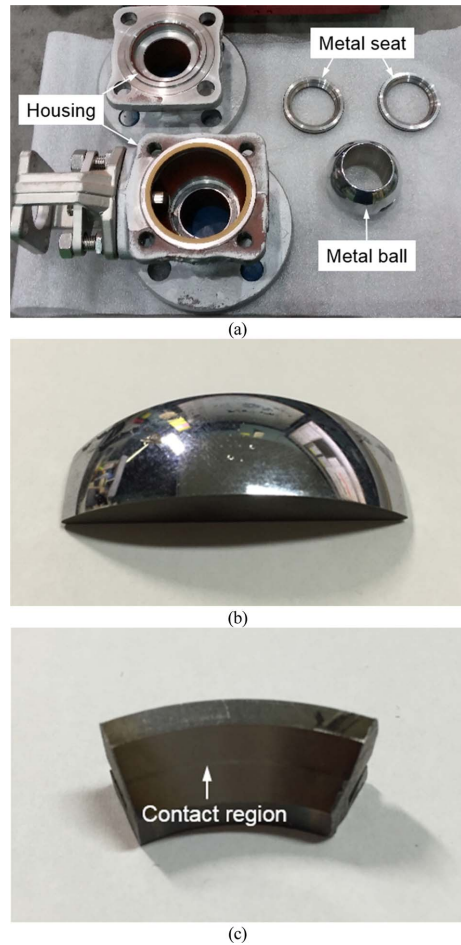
Photographs of (a) components of metal-seated ball valve before the test, (b) metal ball, and (c) metal seat specimens cut for measurement.
